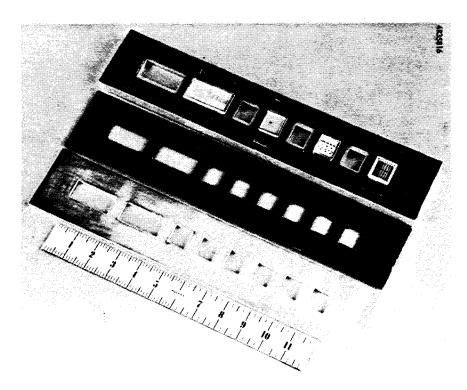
Hybrid masking tooling, partially assembled with foam rubber matt installed under typical parts.
